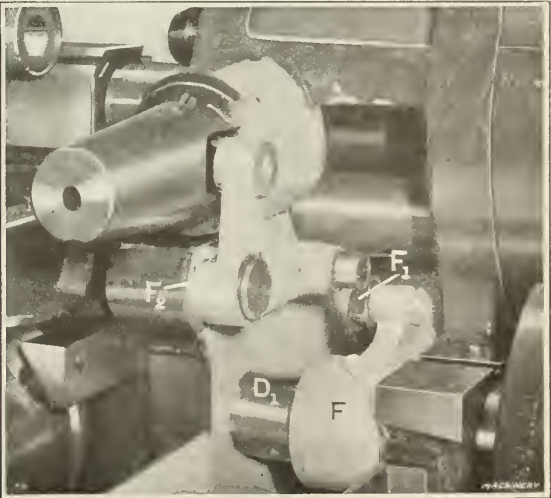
Another View of Spindle-carrier Indexing Mechanism, showing Guard over Locking Bolt for retaining Spring
